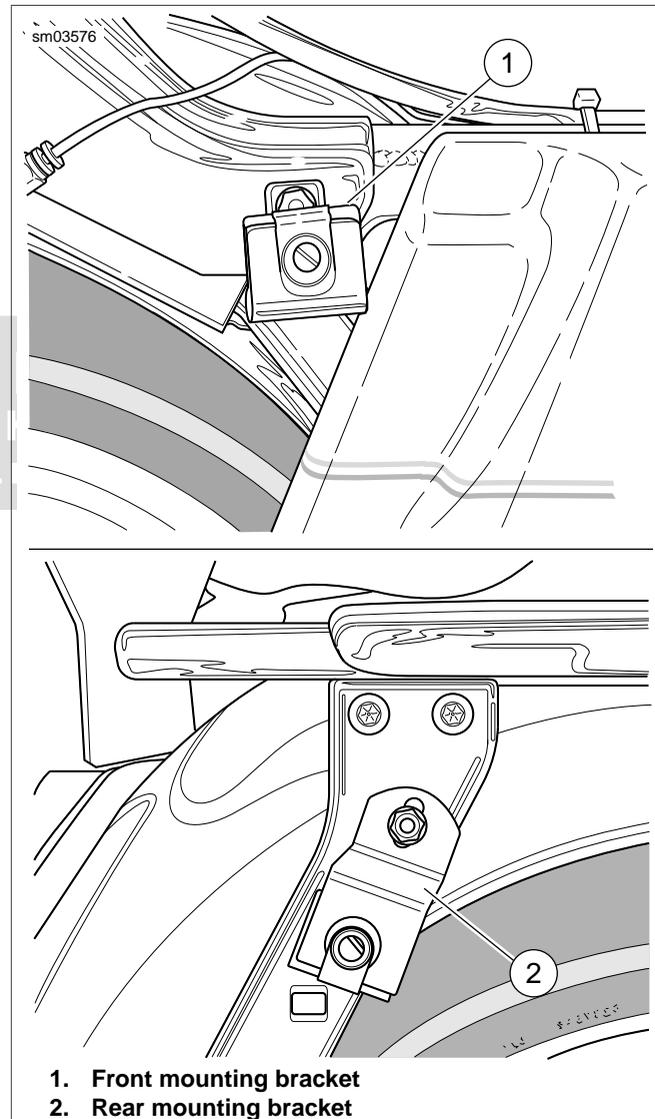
Saddlebag Mounting Brackets (Right Side View)
